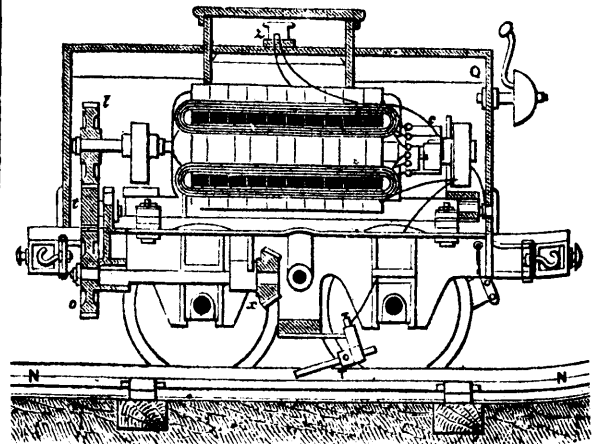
LONGITUDINAL SECTION OF MOTOR.
